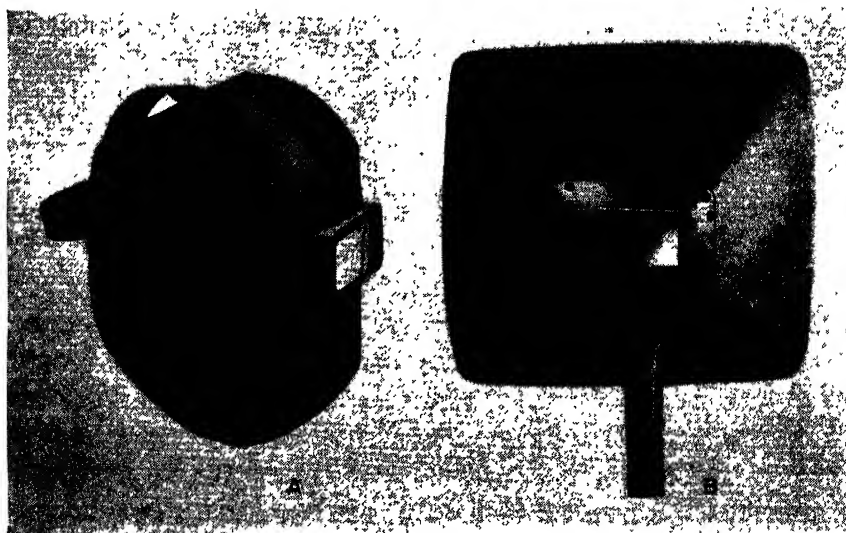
Head and face shields for electric arc welding: A, helmet type; B, hand type.
